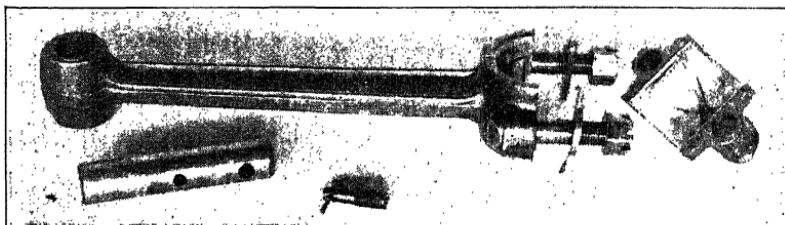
Connecting-Rod Shims Must Be Maintained in Proper Position When Adjusting Bearings
